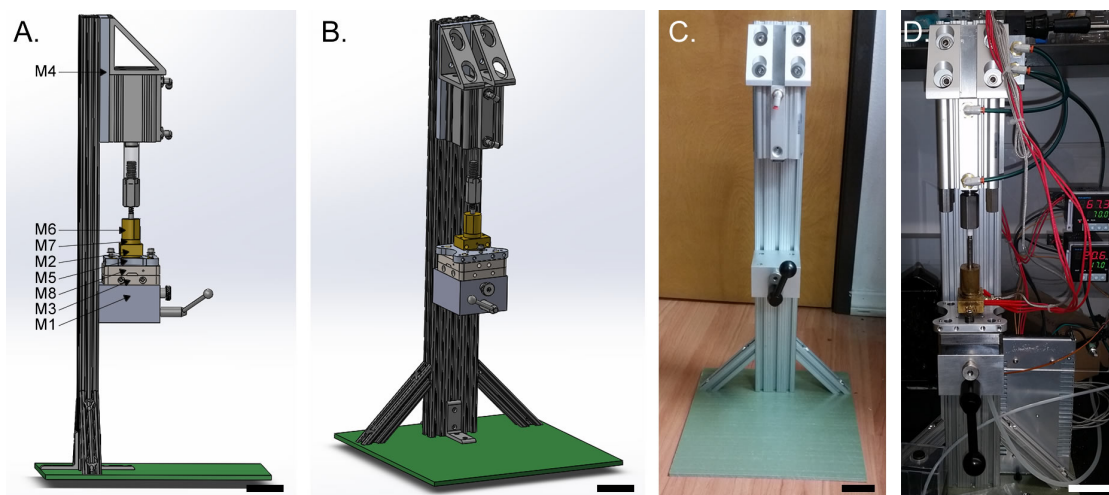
Photographs and computer aided drafting models of the assembled mechanical structure of the injection molding system. All scale bars: 50 mm.
